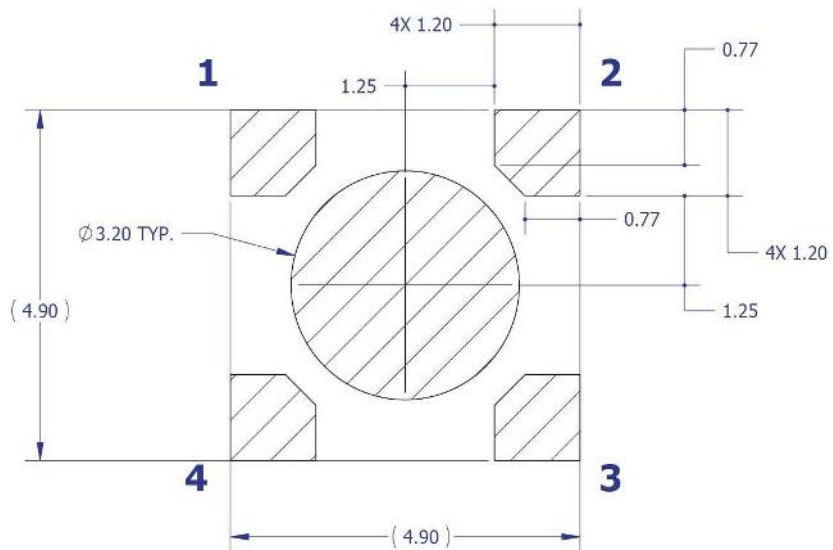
Recommended solder mask opening (hatched area) for anode, cathode, and thermal pad.
